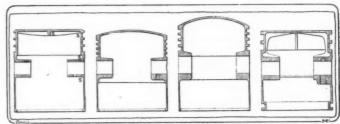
Schildge piston, welded at SSSS. Figs. 2 and 3—Pistons pressed from sheet steel. Fig. 4—Binet cast-iron piston, cast with sections of metal down to 1.8 millimeter
